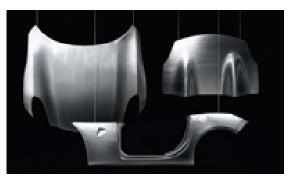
Pontiac Solstice car body parts made by hydroforming
